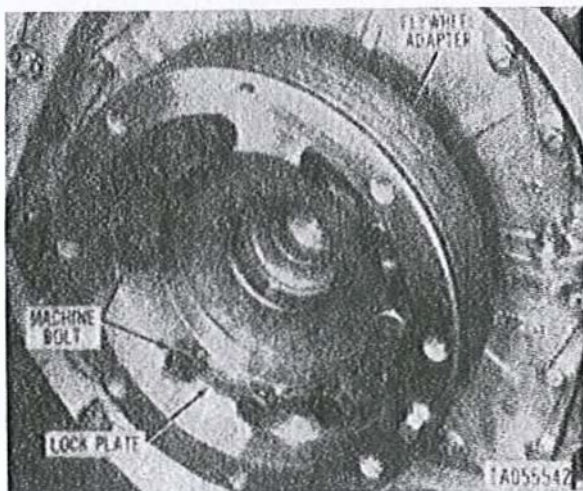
Removing flywheel adapter lock plates and machine bolts, model AVDS-1790-2DR engine.
